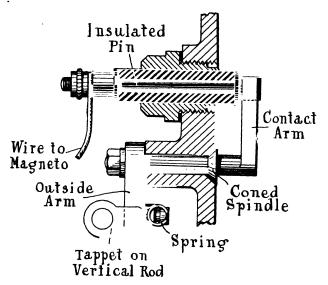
Sectional Plan of Low Tension Magneto Contact Breaker or Igniter.
